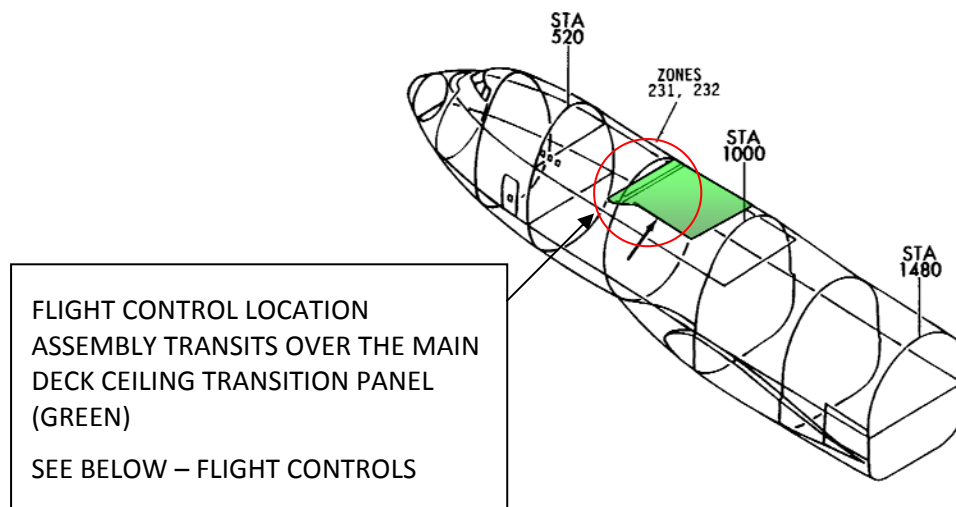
MAIN DECK TRANSITION CEILING PANEL DIAGRAM STATION 718.74 TO 900
